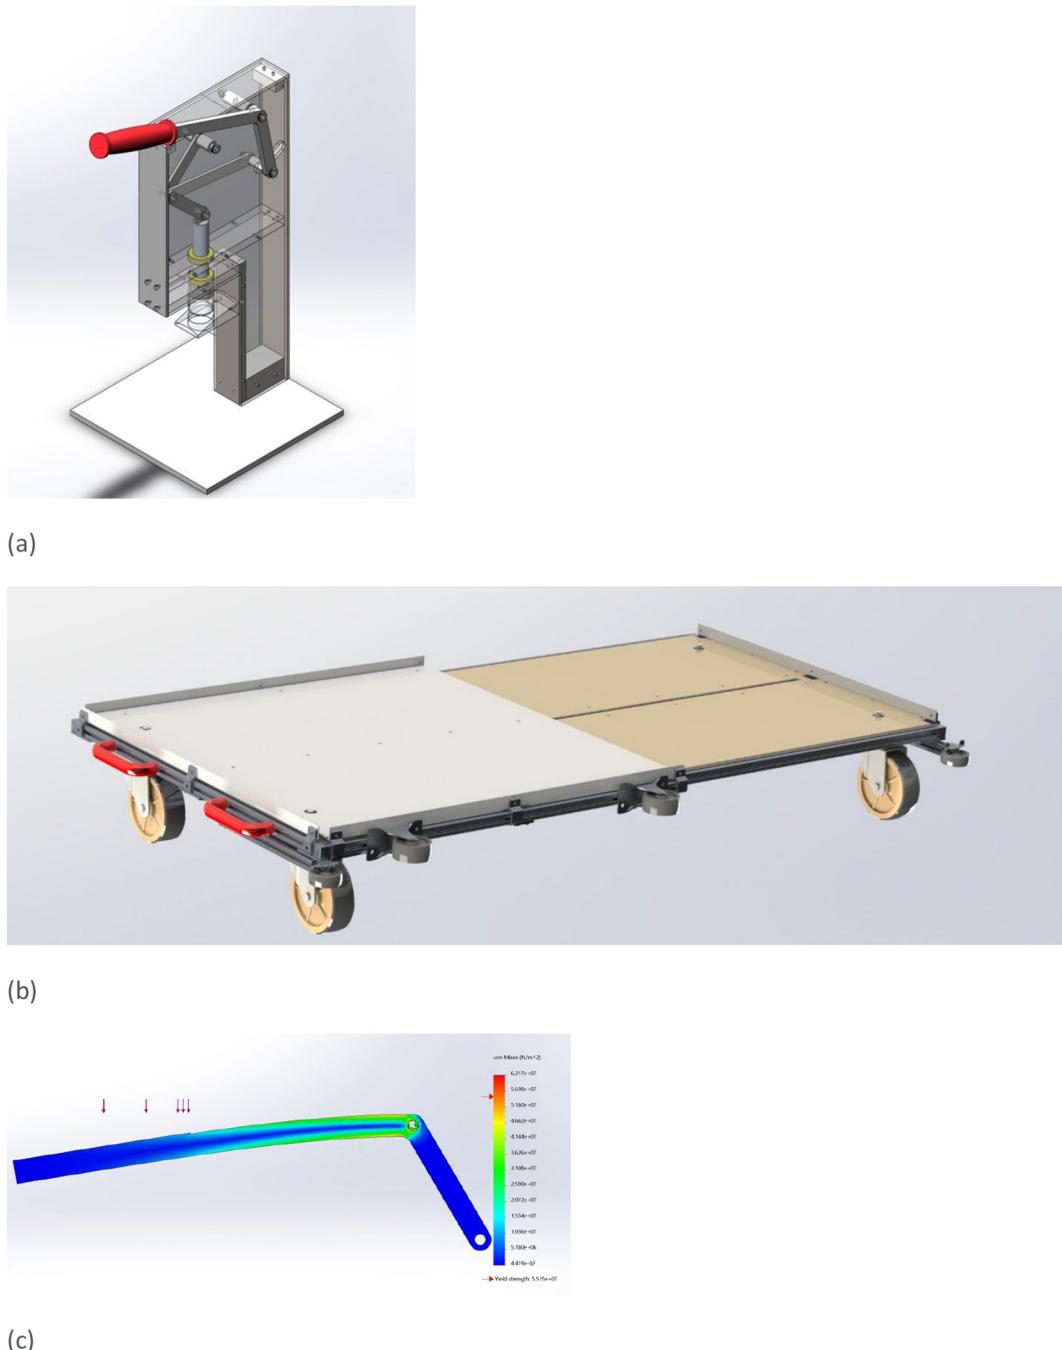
CAD assembly for (a) pot-hole punch, (b) plant cart, and (c) FEA of pot hole punch handle.
